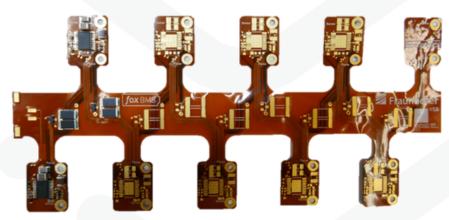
Flexible PCB with single cell EIS sensors (FHG IISB
